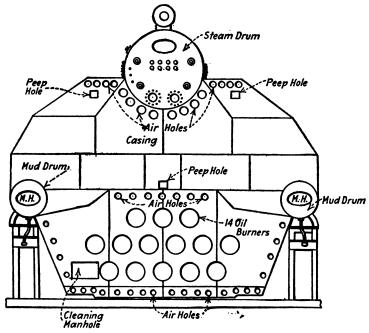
Boiler Complete Showing Casing and Number of Furnaces in Detail — White-Forster Boiler
